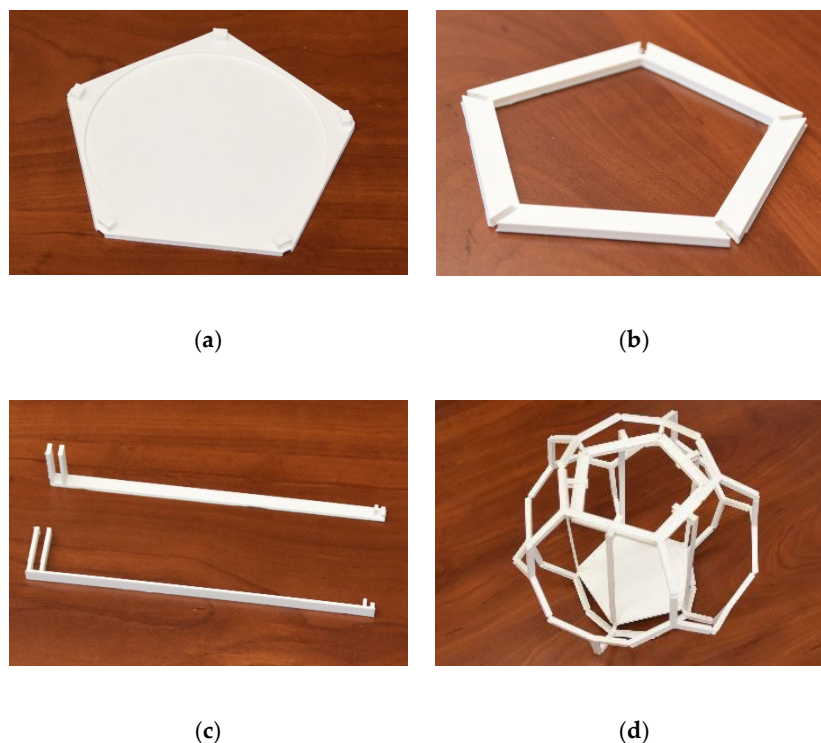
3D printed pentagonal ring (a), supporting part (b) fixation for possible inner payload (c), and the complete model (d).
